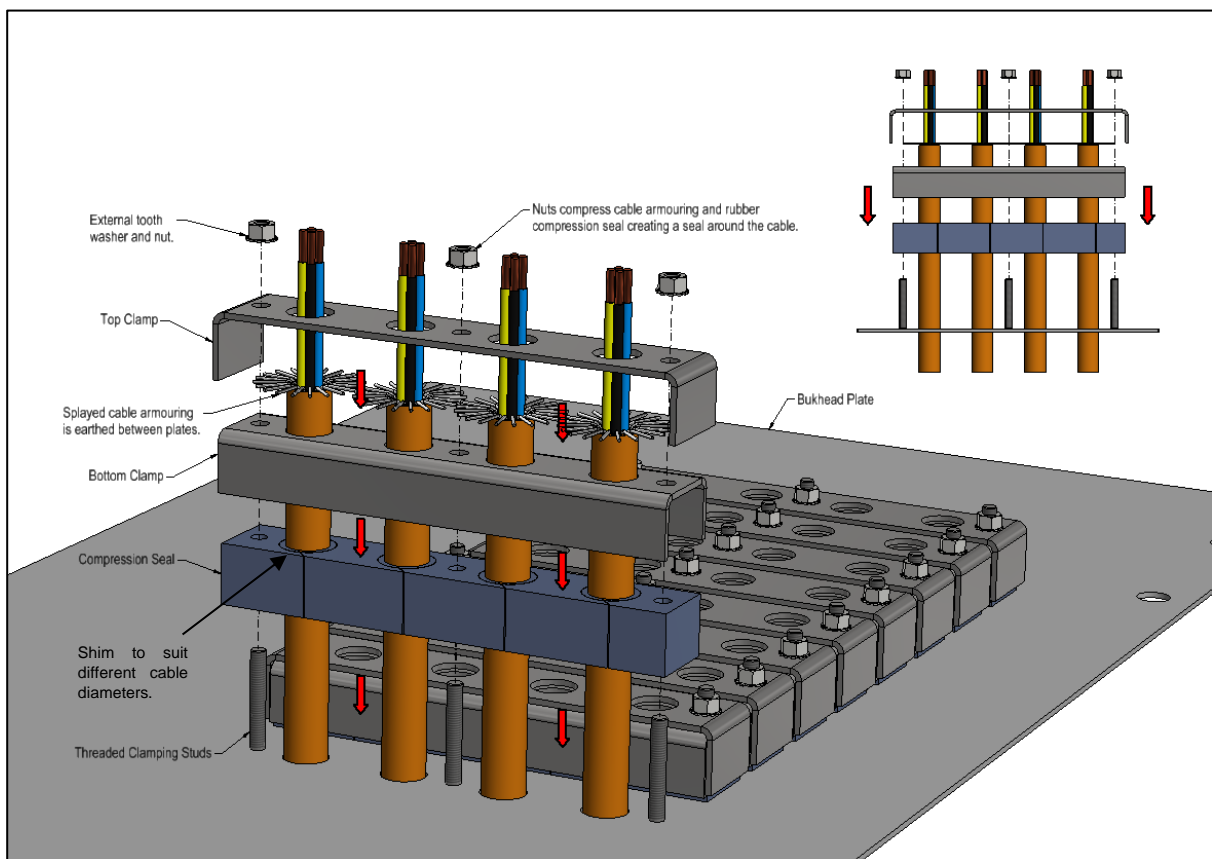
Plus+ Sealed Base Kit Components and Earthing Mechanism
